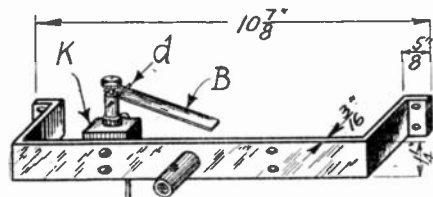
Shaft bearing and brush support to be seen also in Figs. 1, 8 and 9.
